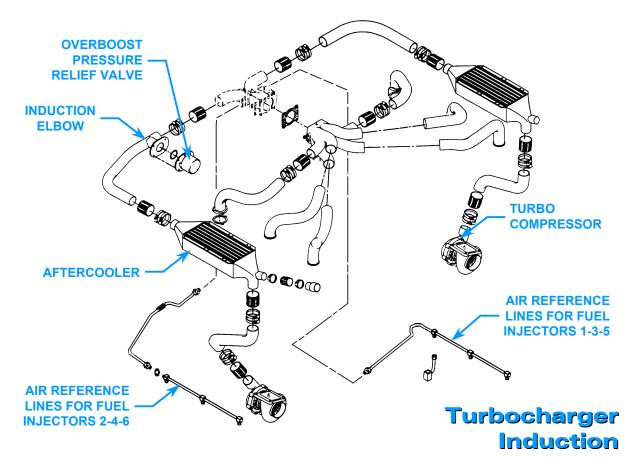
Exploded View of TSIO-550-E Induction System Components
